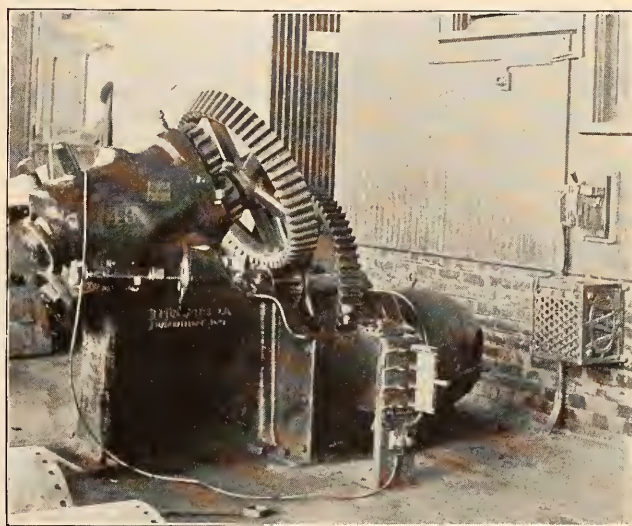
LENOX ROTARY BEVEL SHEAR DIRECT CONNECTED TO 10 H. P. MULTIPLE VOLTAGE CROCKER-WHEELER MOTOR.
